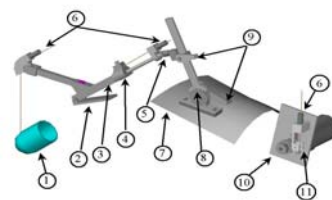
Main components of the exoskeleton: 1-Finger Cup, 2-metallic plate attached with Velcro to the proximal phalanx, 3-Structure for support and finger flexion measurement, 4-Steel rod & linear bearing, 5-Universal Joint, 6-Pull cables for force transmission, 7-Cushioned thermoplastic plate for exoskeleton support on the hand, 8-Adjustable Support, 9-Adjustment levers, 10-Motor module, 11-Strain gauge for measurement of force applied to the fingers.
